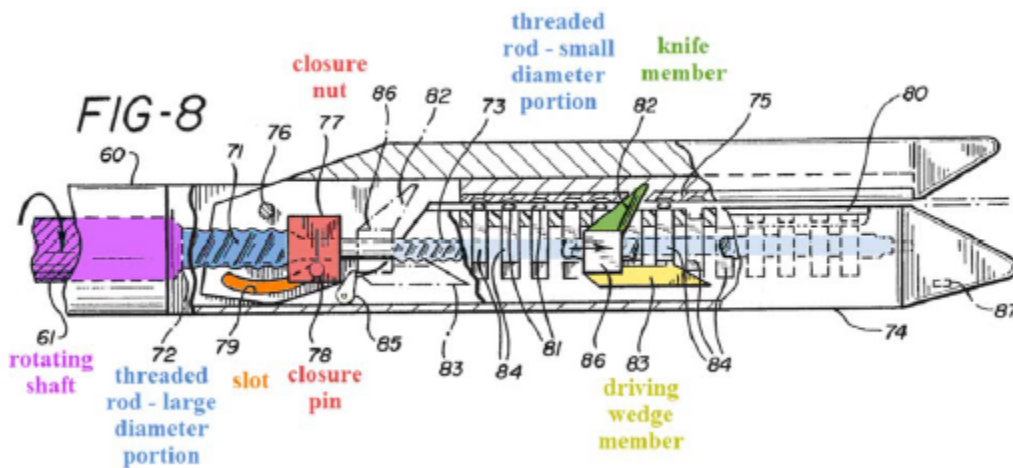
is an enlarged longitudinal cross-sectional view of the head of endoscopic stapling and cutting instrument 30 with the head in the position of firing staples.
